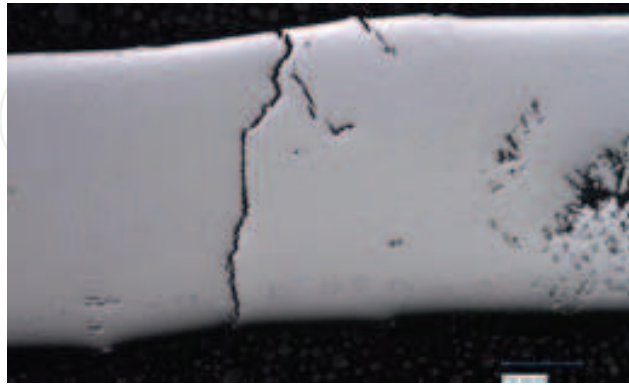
Sample of laser welding by Fidelis without filler observed by optical microscope.
